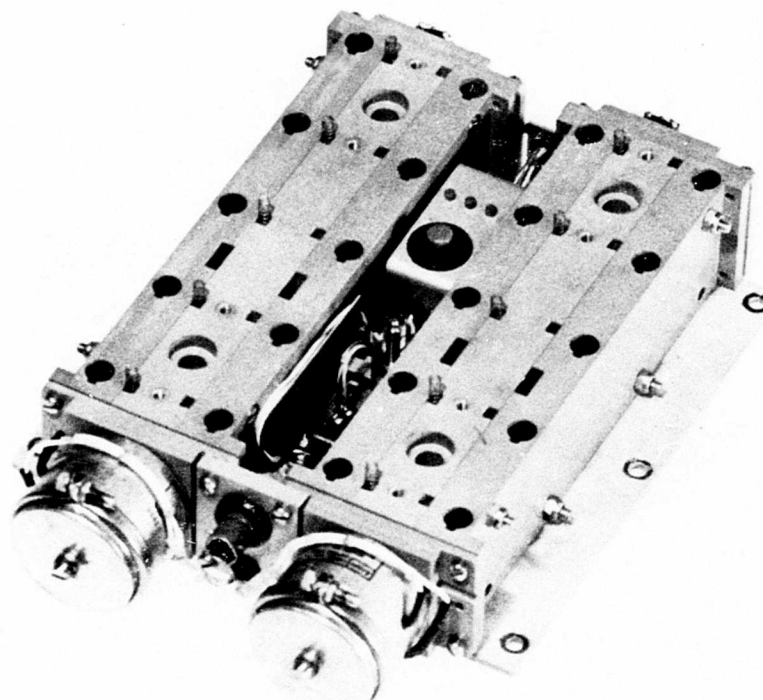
FIRING MECHANISM ASSEMBLY (BREECH PLATE REMOVED)
